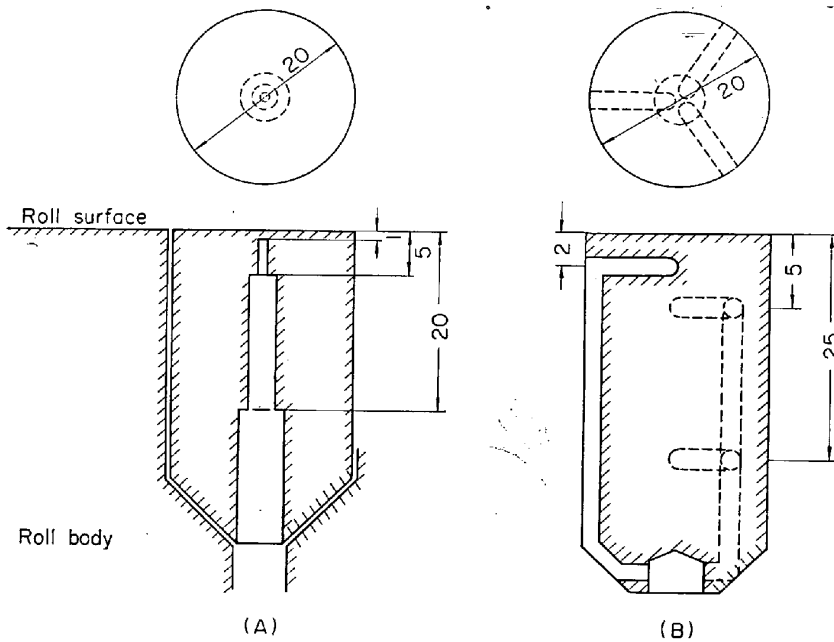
Steel pieces to be inserted in the roll surface, with thermocouples welded in the holes.
